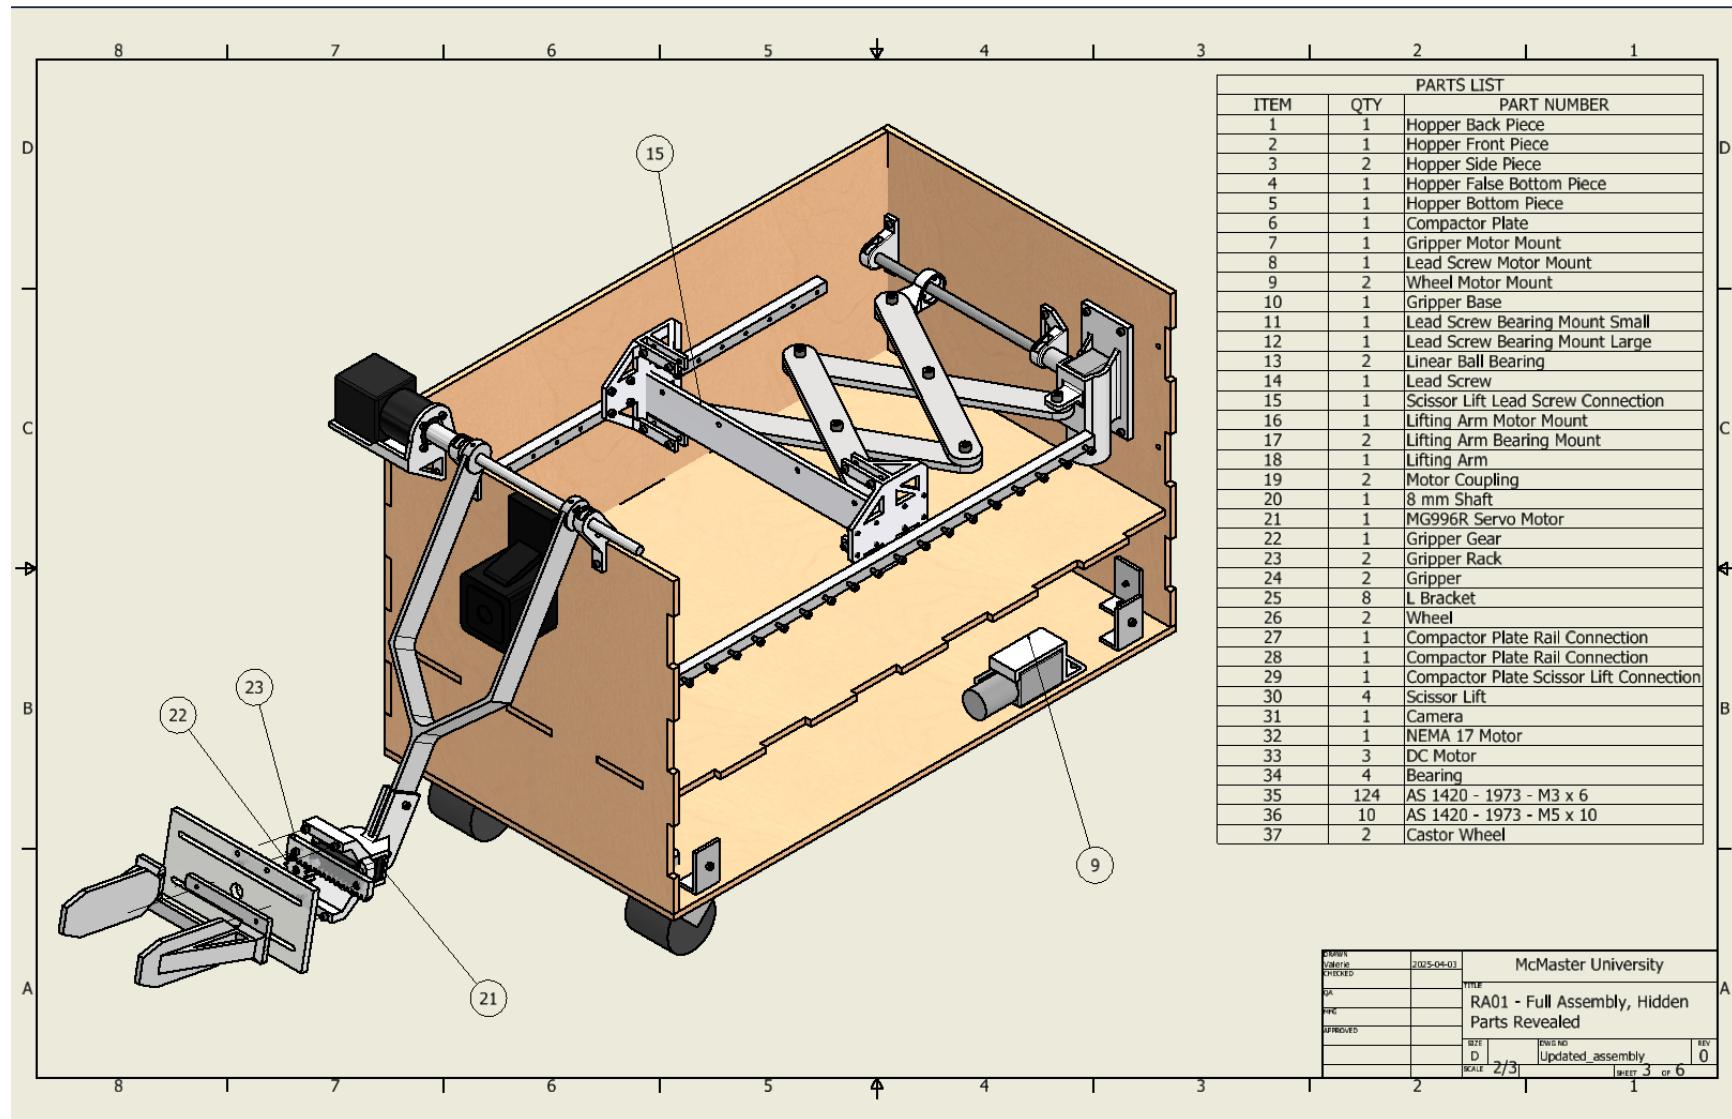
Full Assembly with Labelled BOM, Side Wall and Wheel Not Visible
